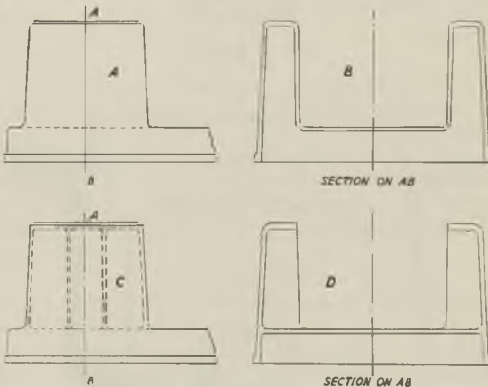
A BEDPLATE CASTING. UPPER SKETCH "AS DESIGNED," AND LOWER SKETCH "AS MADE."
